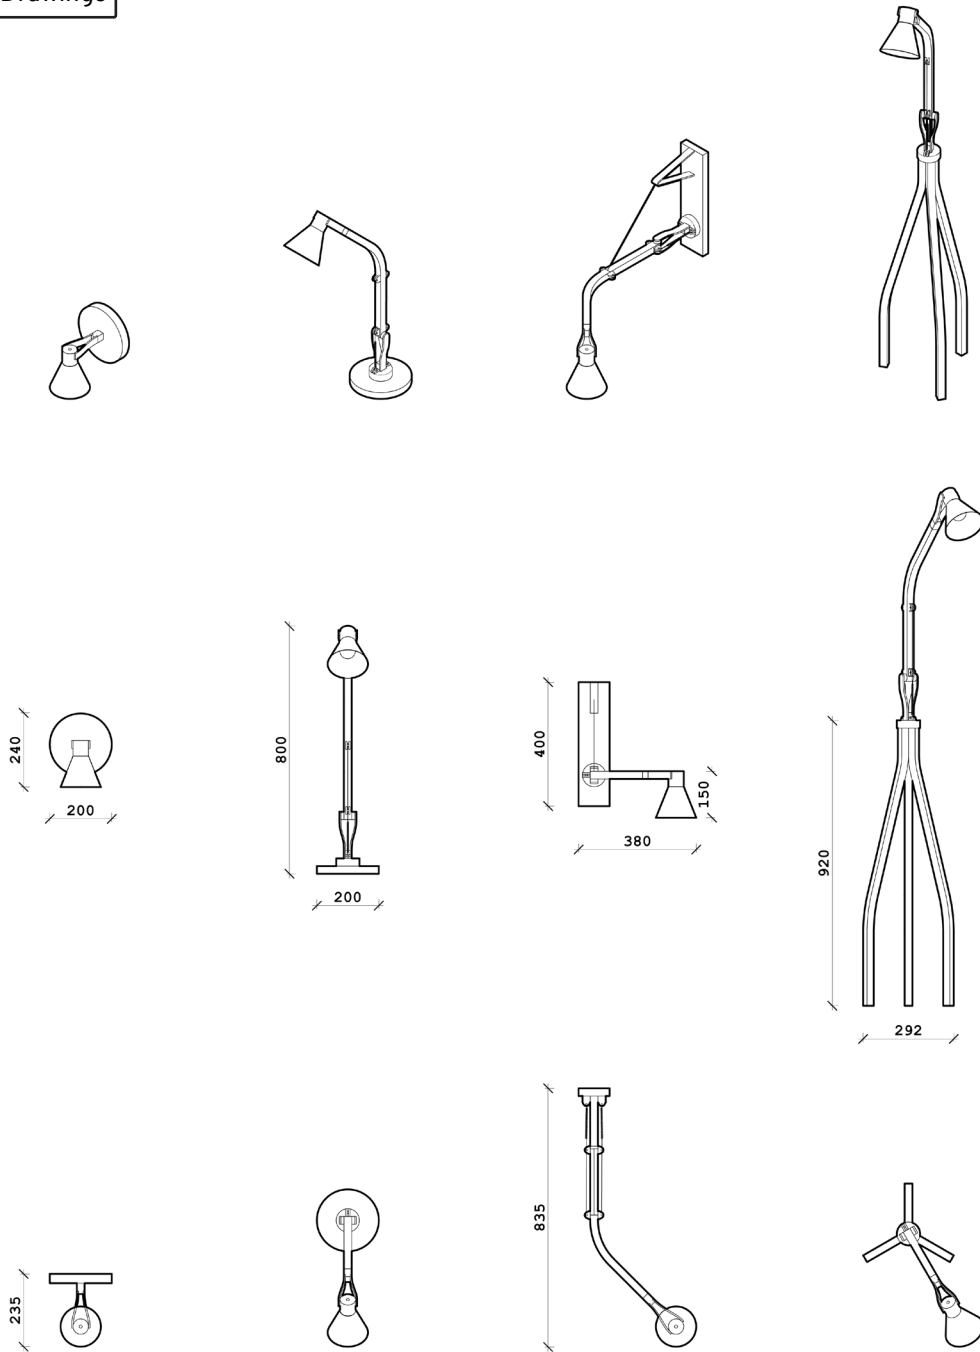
Lamp Exploded Axonometric Drawing By Author
